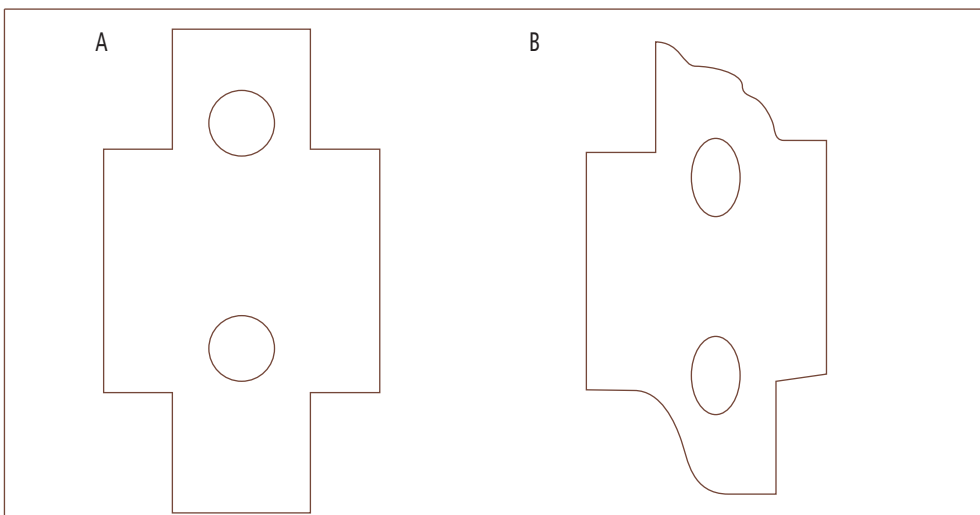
(A) New hammer, (B) worn hammer from a hammer mill (P. Tibasiimwa)
